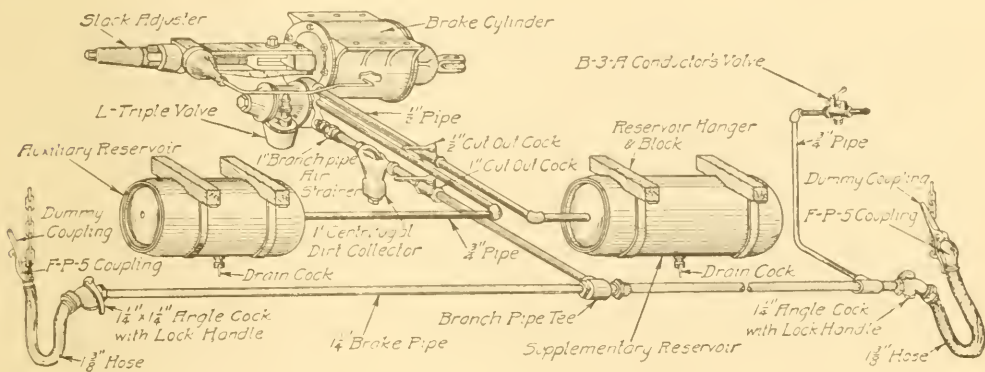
Westinghouse Piping Diagram for “LN” Passenger Brake Equipment
